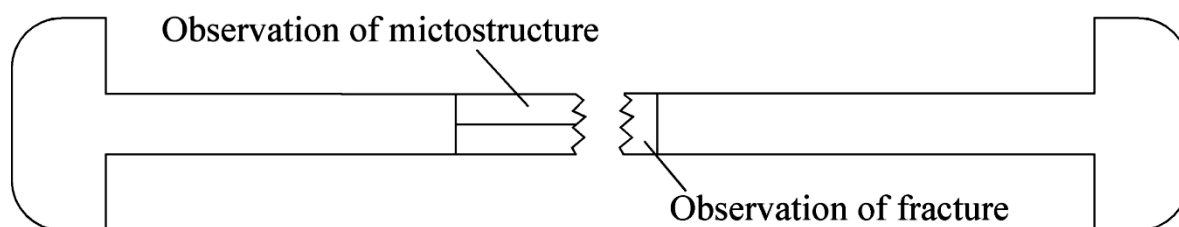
Cutting positions of various test pieces of casting of the permanent mold for solidification cracking test.
